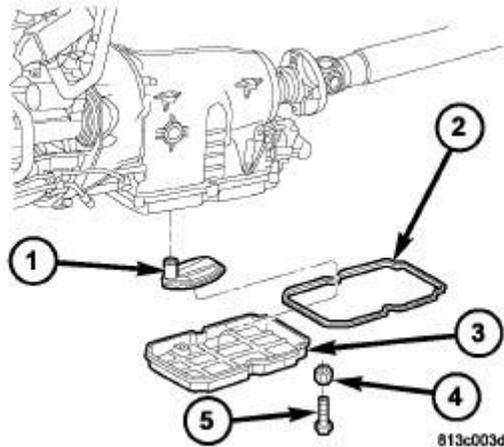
Oil Pan, Gasket, Filter, Retainer & Bolt
